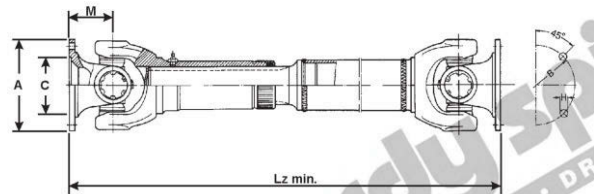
Shaft installation and line drawing (Hardy Spicer, 2014).
